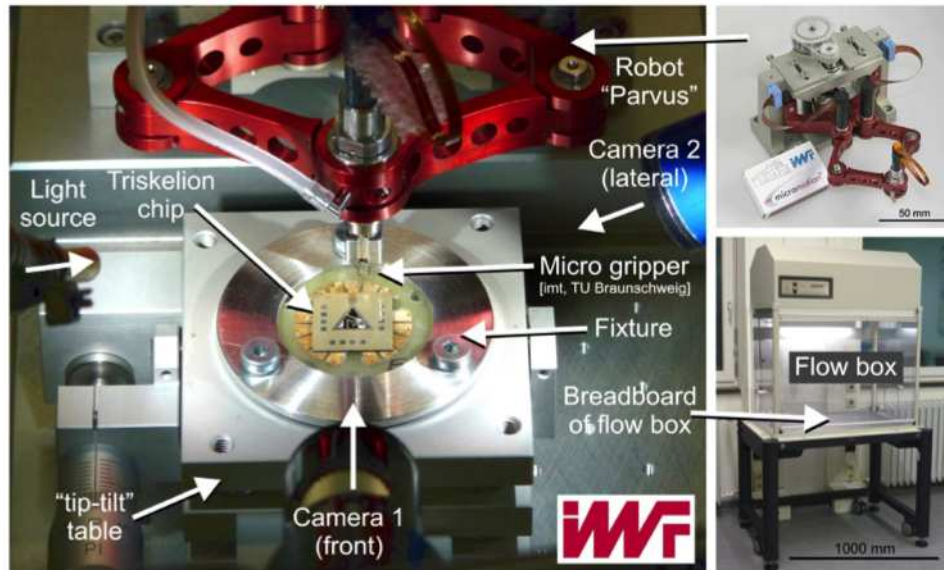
Image of the assembly system setup at TU Braunschweig. The flow box enclosure for the assembly system ensures a low noise environment for operation, free from disturbing air currents. Image courtesy of TU Braunschweig
